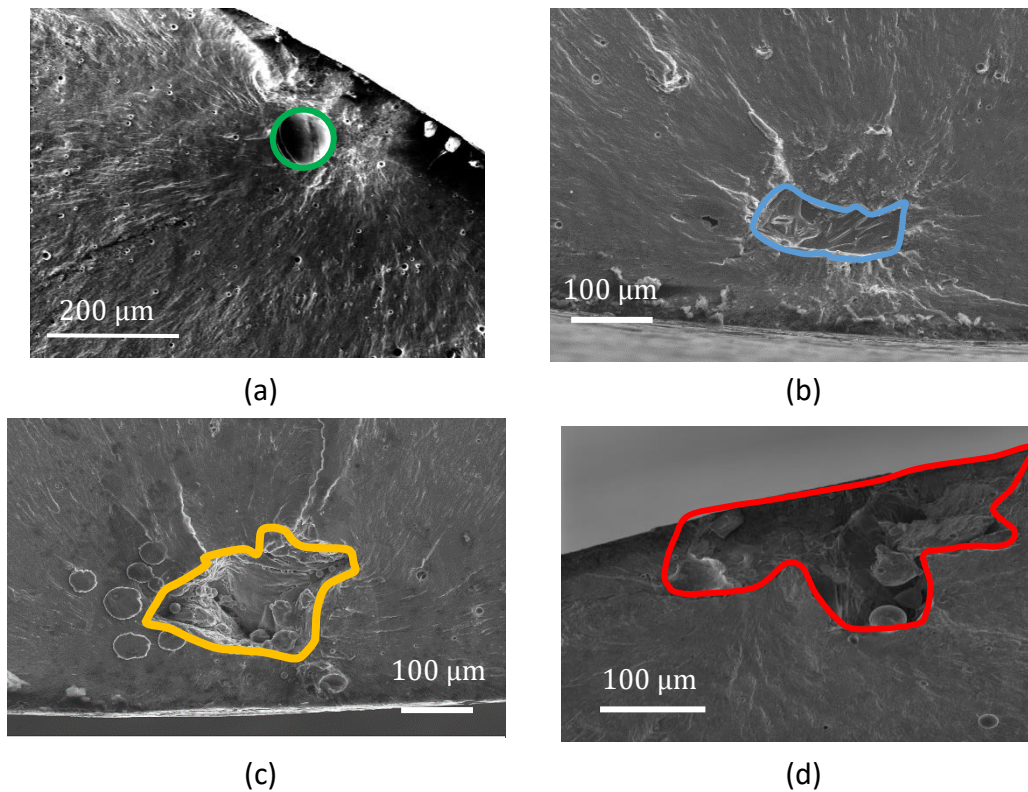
Types of critical defects: a) pore; b) Improper layer bonding (ILB) defect; c) defect due to incomplete fusion (IF); d) irregular surface defect (Irregular SD).
